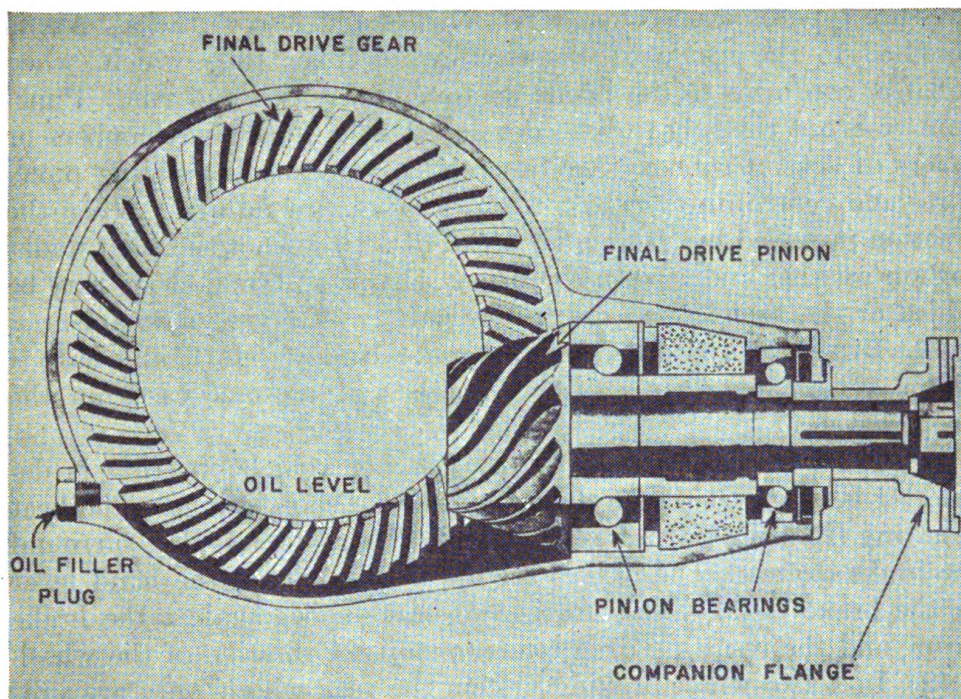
Hypoid gear type of final drive showing relation of pinion to final drive gear.
